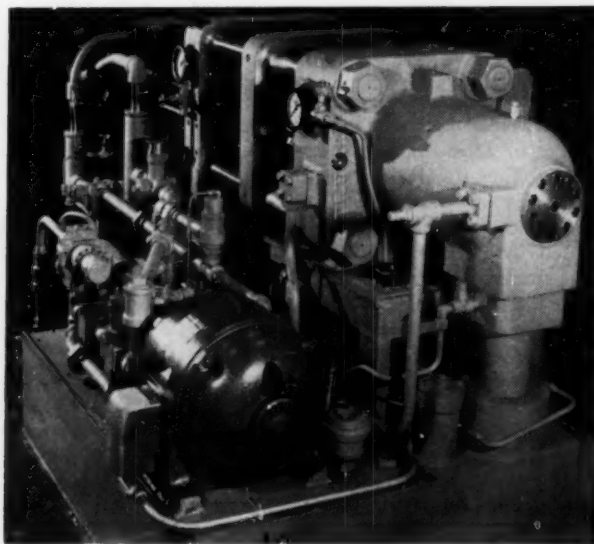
REAR VIEW OF SMALL ALUMINUM-DIE-CASTING MACHINE
